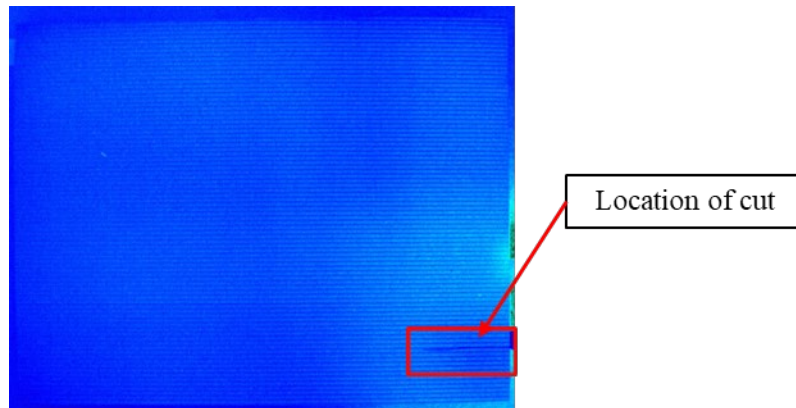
IR image of a 3D printed sample with a slot cut between bead layers with air flow off
